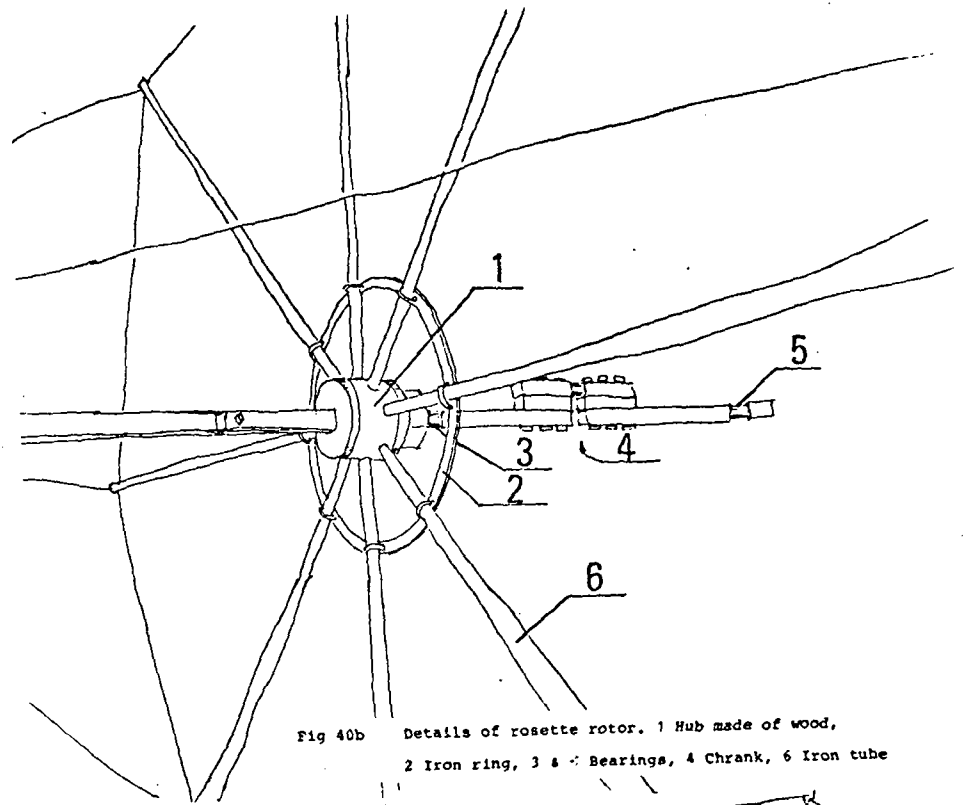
Details of rosette rotor. 1 Hub made of wood, 2 Iron ring, 3 & 4 Bearings, 4 Crank, 6 Iron tube
